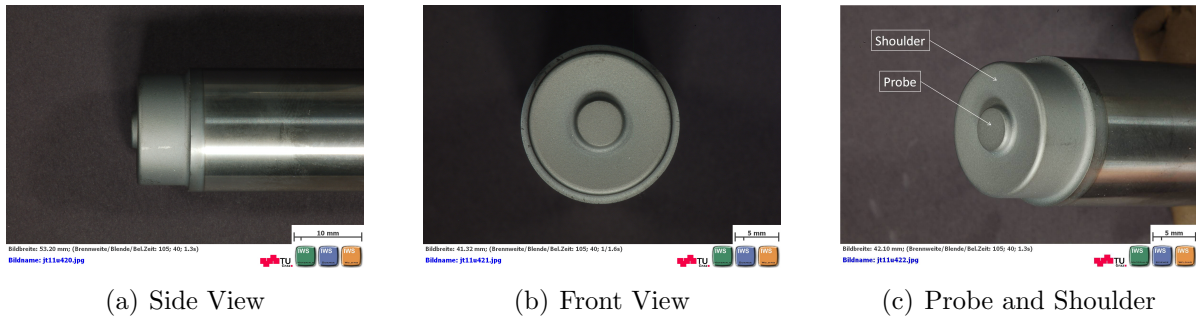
Sintered tungsten carbide - cobalt FSW-tool
